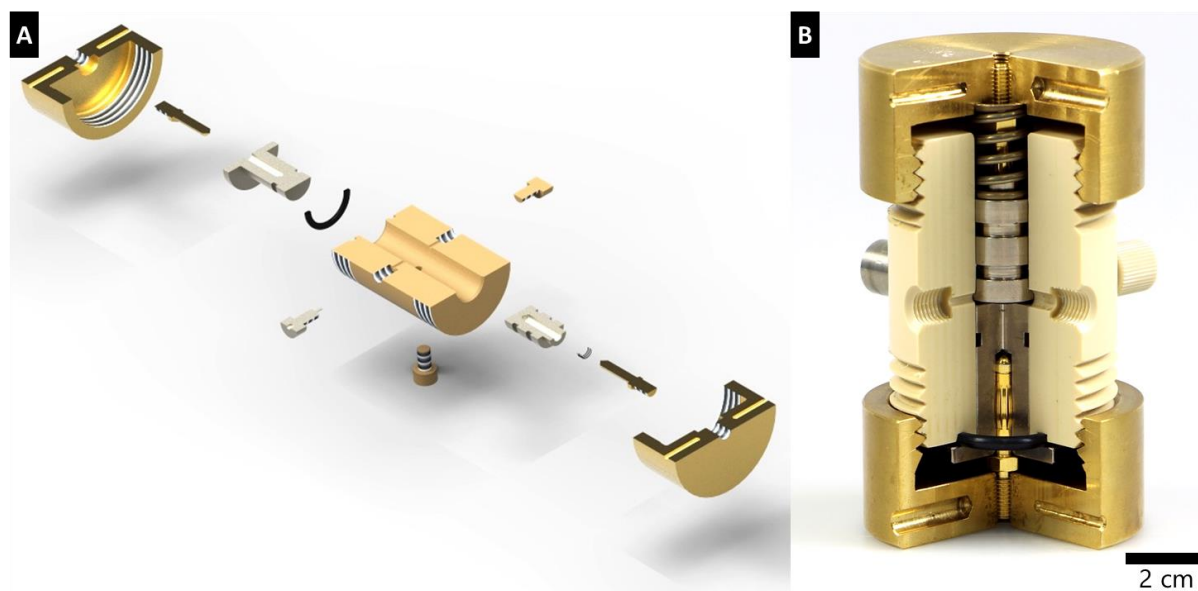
(A) Exploded drawing and (B) a picture of the cut-open custom-built electrochemical test cell.
